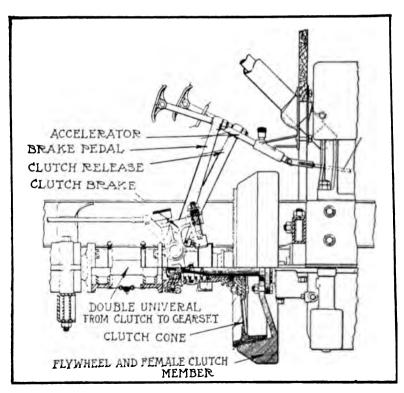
Clutch and Control Pedal Assembly of Rational Automobile
